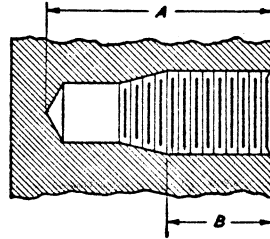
Preferred Depth of Holes for Threaded Parts
